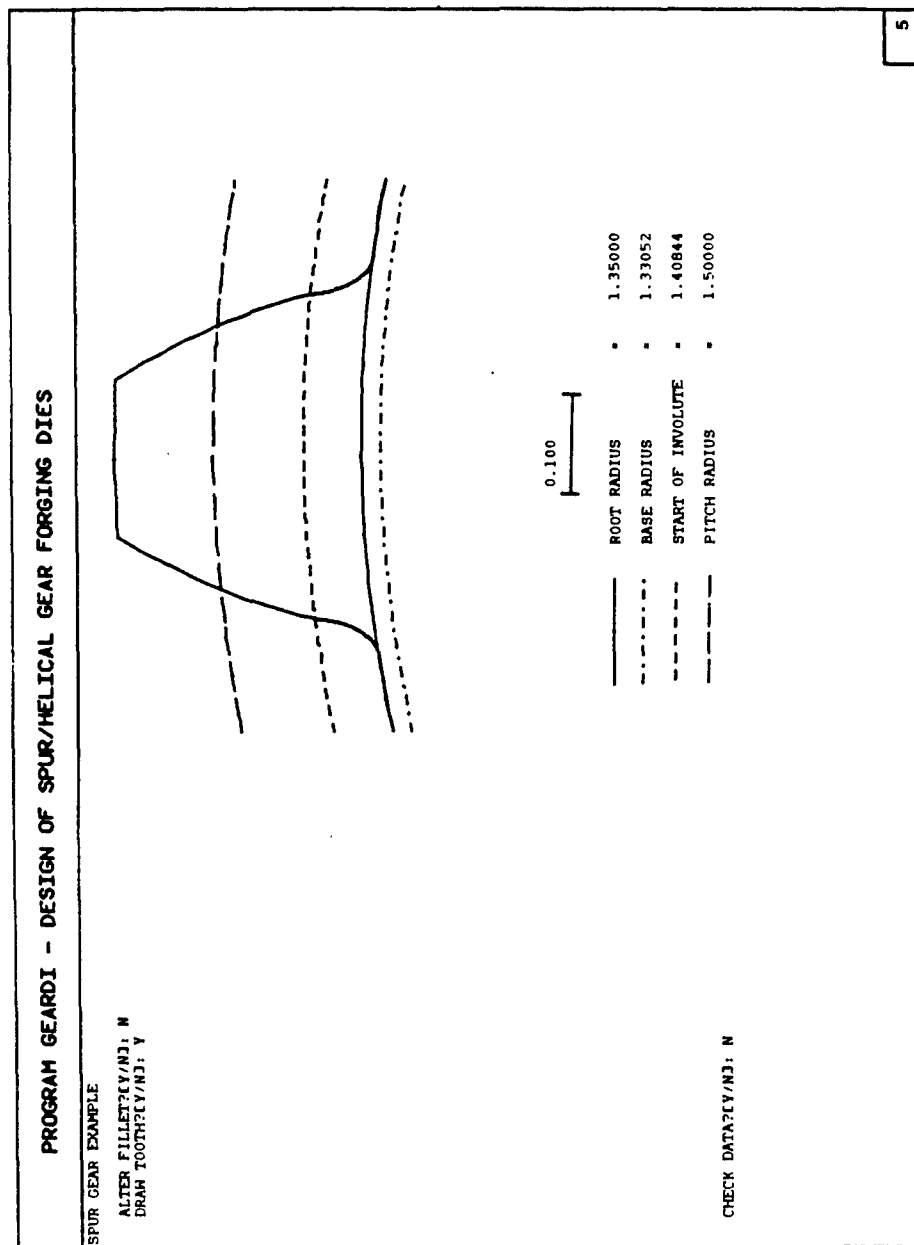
Spur Gear Example; Drawing of Tooth Profile (path of mating gear)
